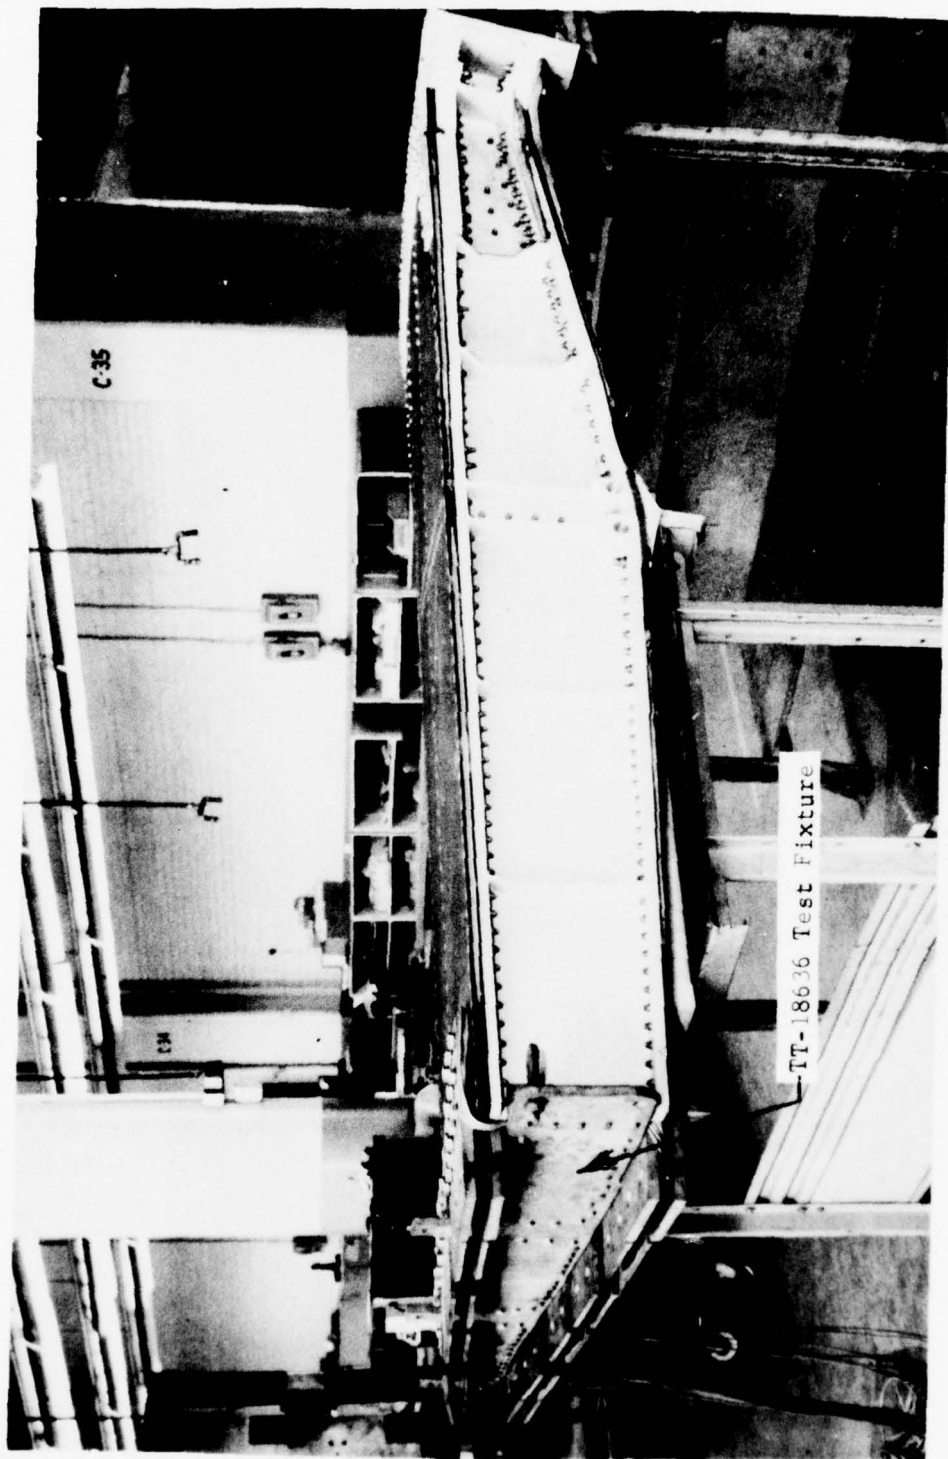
COMPOSITE WING BOX ASSEMBLY - REAR VIEW
